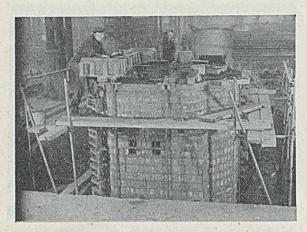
Larger Mould being made ready for Casting. Note the Runner Box and Flow-off Riser.
